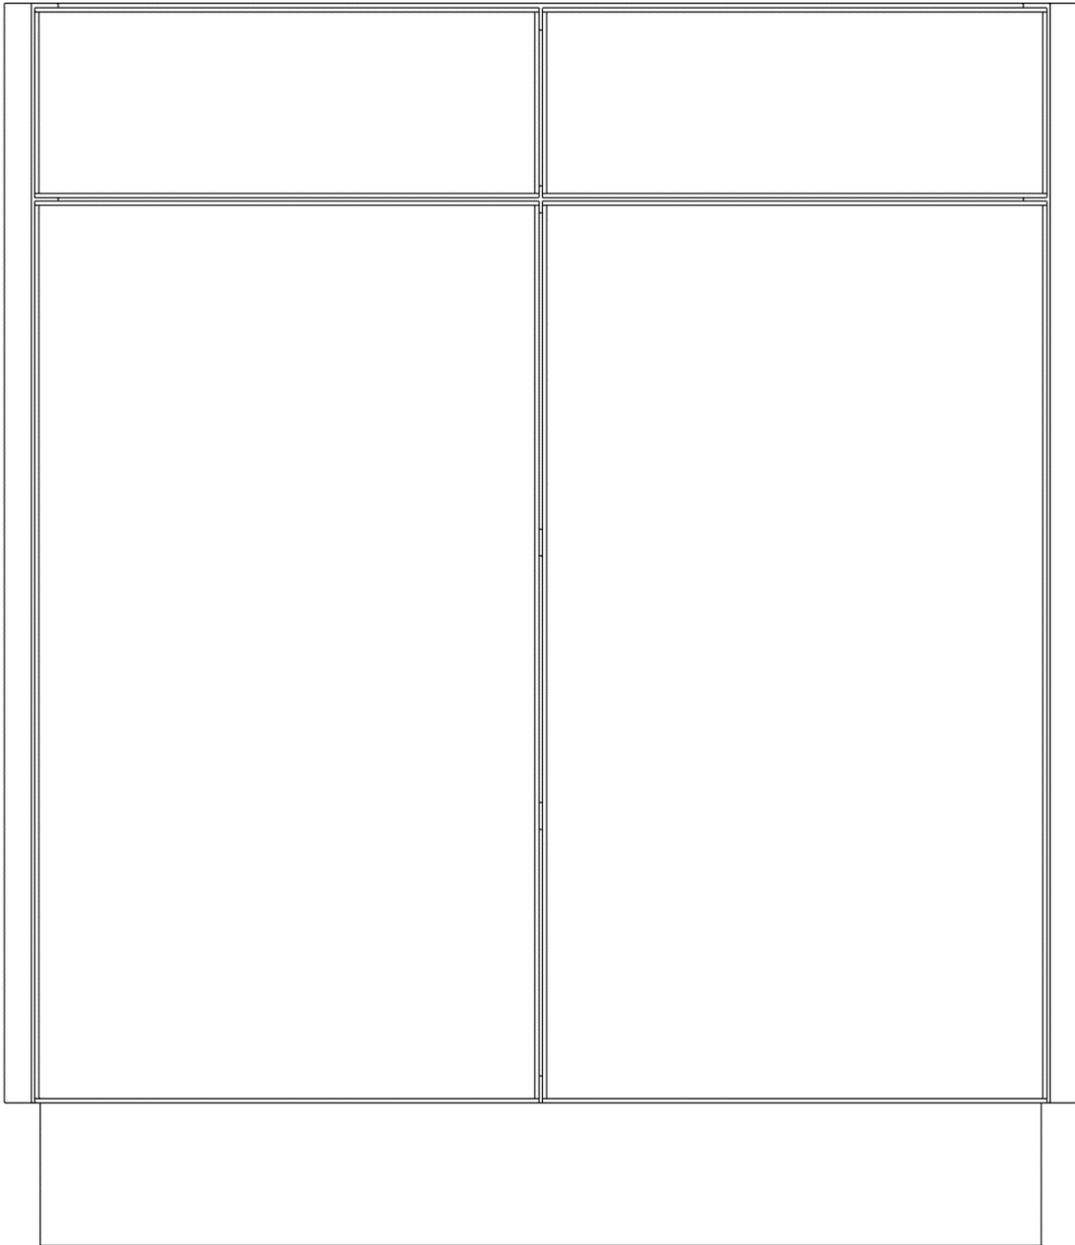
A frameless base cabinet with banded slab doors & drawer fronts.
